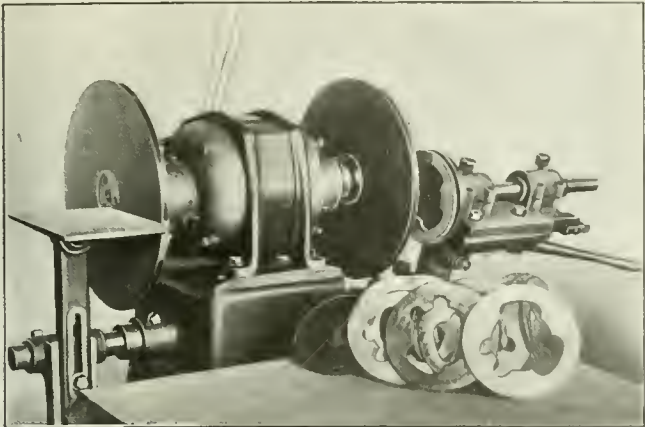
Grinding Bronza Clutch Disks; Rate, 60 Disks or 120 Sides per Hour
